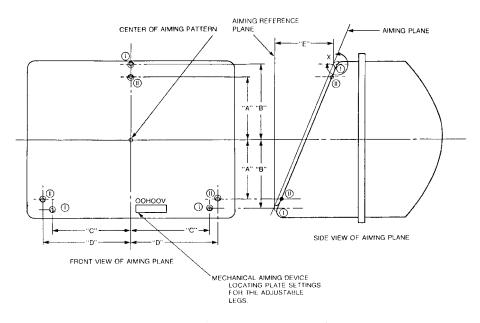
Dimensional Specifications for Location of Alming Pads on Replaceable Bulb Headlamp Units
